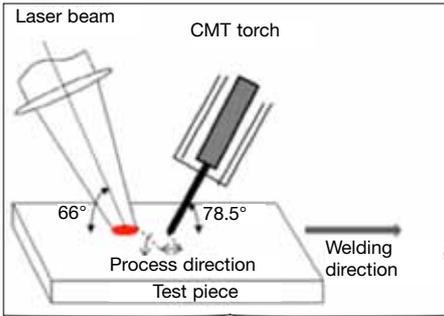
Schematic illustration of experimental set-up of laser assisted GMAW process. The laser beam trails behind the CMT (Cold Metal Transfer) torch in order to provide post weld heating.
